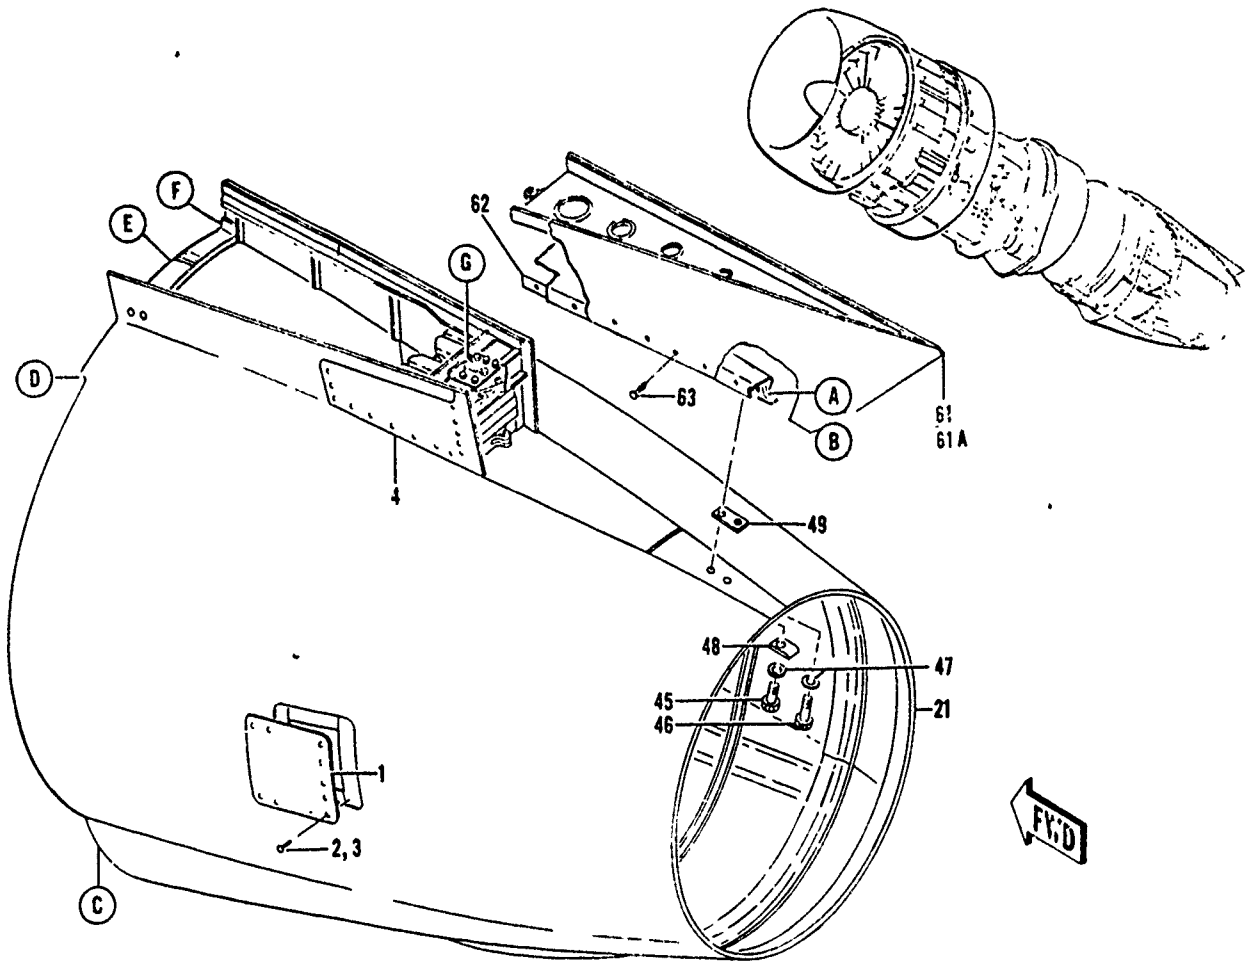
Aft Thrust Reverser and Sleeve Assembly (Sheet 1 of 3)
